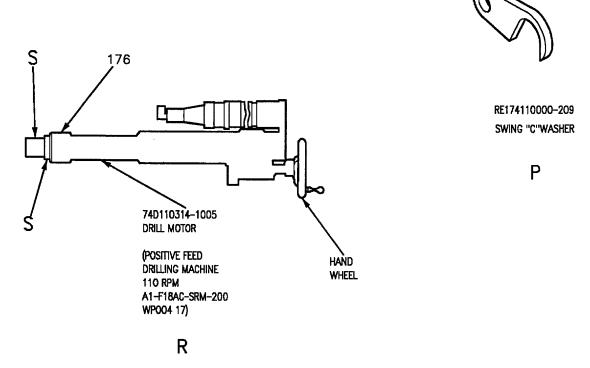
Setting Up to Machine I.D. of Bushing or Lug at Location 1, Y453.000 (Sheet 5)
